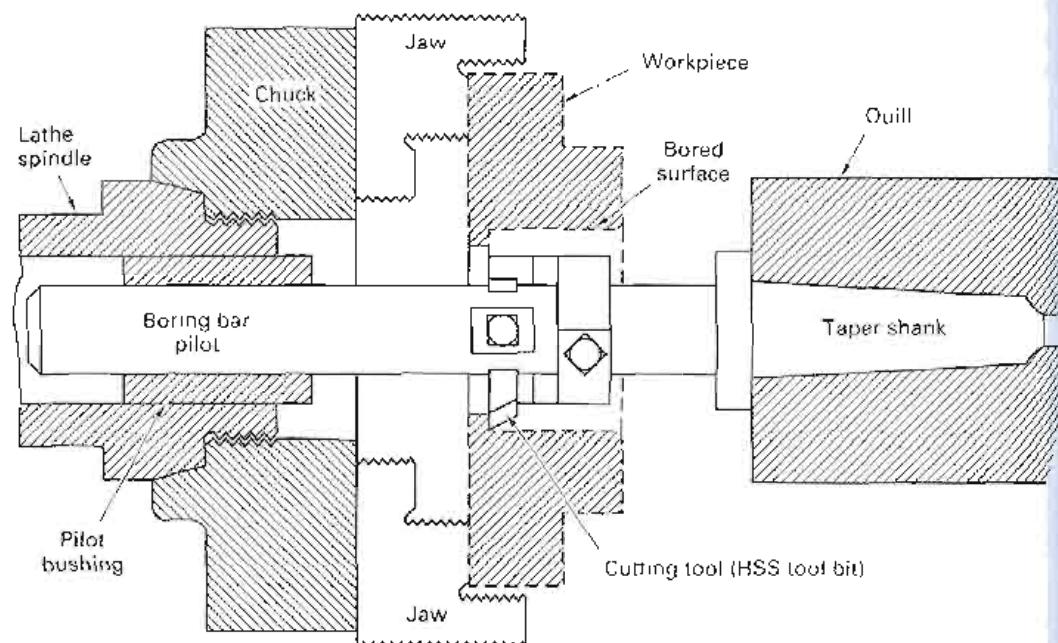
Pilot boring bar mounted in tailstock of lathe for precision boring large hole in casting. The size of the hole is controlled by the rotation diameter of the cutting tool.
